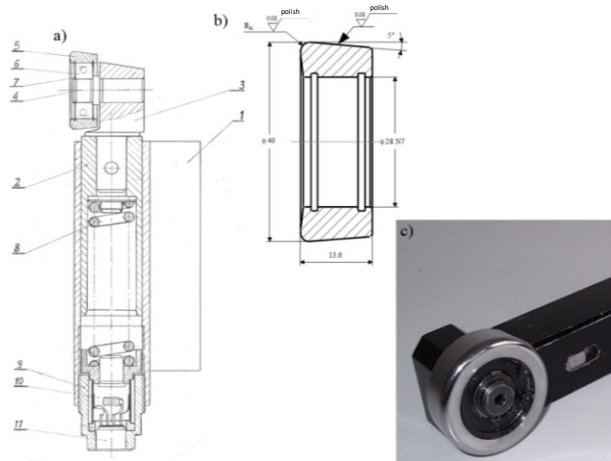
Construction of burnishing tool with strain gauge way to measure burnishing force and construction of burnishing roll: a)- assembly drawing of the tool, b)- working drawing of burnishing roller, c)- photograph of the tool, 1- shank, 2- slider, 3- roller frame, 4- spindle, 5- burnishing roller, 6- ball bearing, 7-locking ring , 8- spring, 9- clamping nut, 10- strain gauge unit, 11-voltmeter connection socked.
